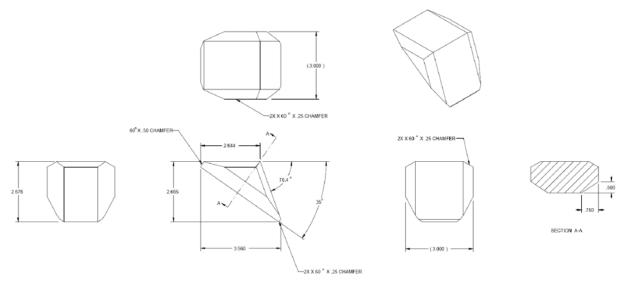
Dimensional drawing for fabricating Wheel Support Wedge
